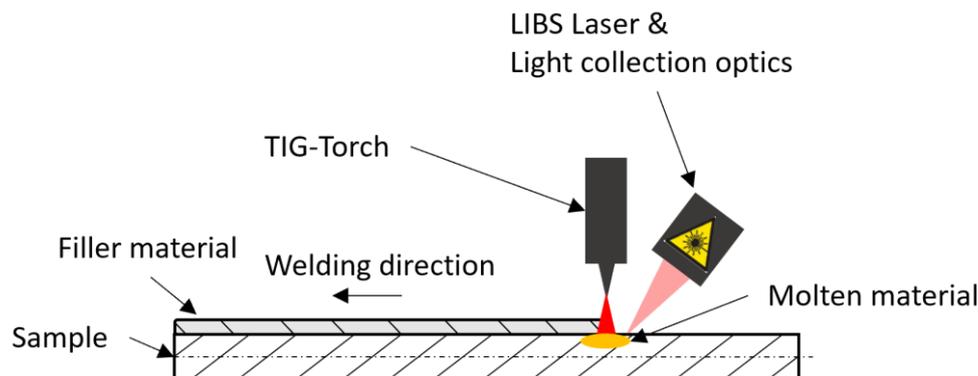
Principal sketch of the experimental set-up of the TIG welding and in situ LIBS measurement.
